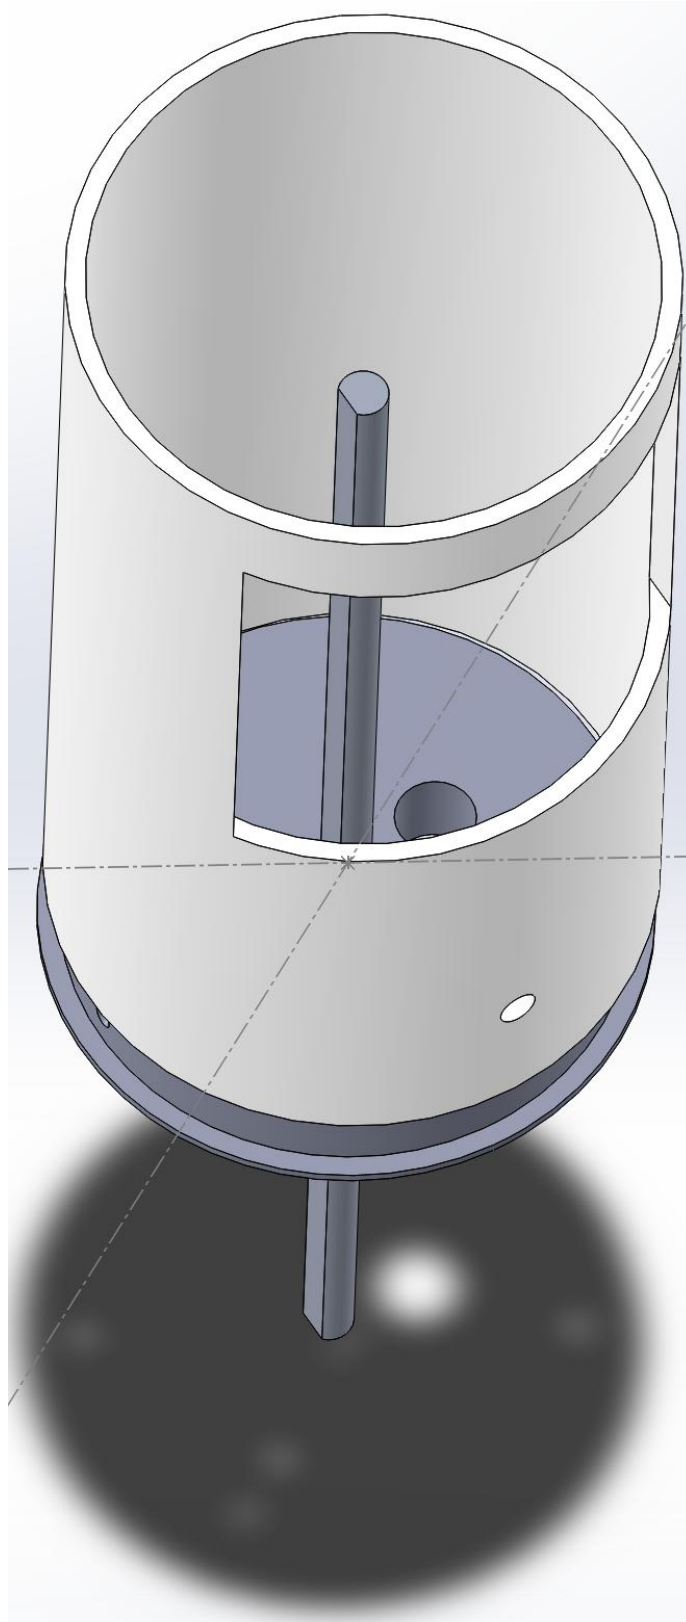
Composite model showing the assembly of the shaft and twisting mechanism.
